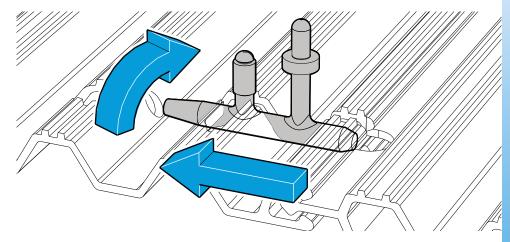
(C40) Lift and slide these Locking Bolts / TamperProof Locking bolts into the open position
